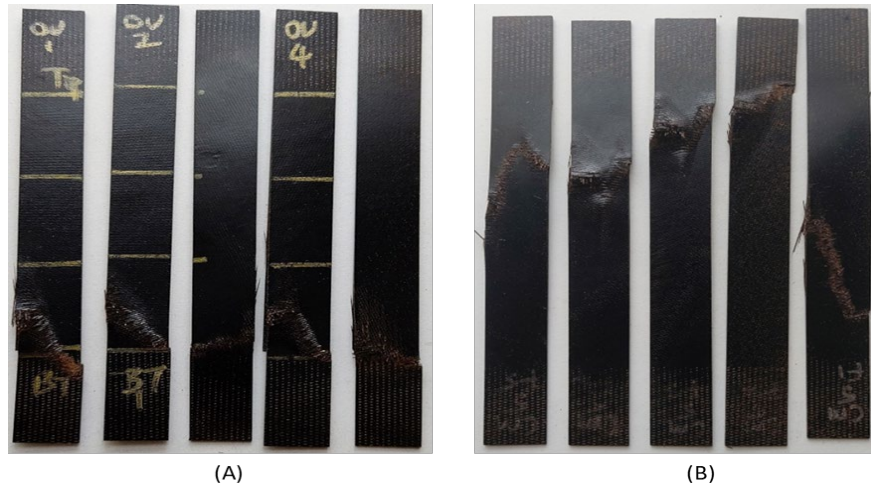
Fractured specimen after tensile test of (A) OVC test coupons (B) CM5 test coupons.
